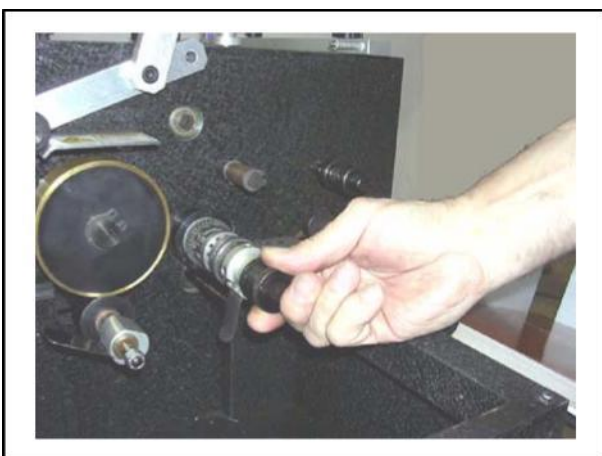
Slide Lower Cut Off From Shaft
